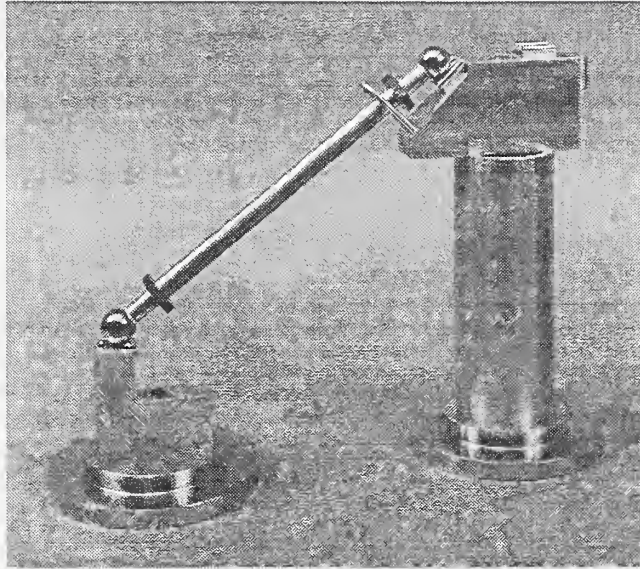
Inserting M10 bolt into parallel cylinder top mount
